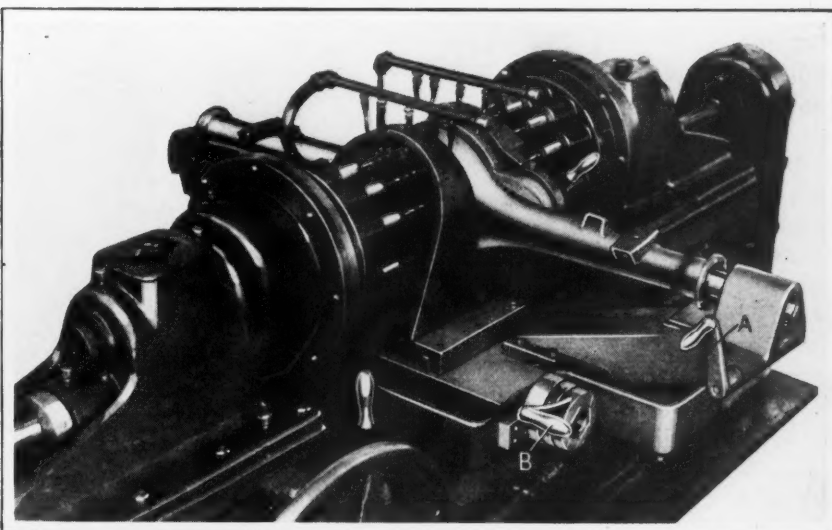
Drilling Ten Holes Simultaneously in Both Faces of the Housing
